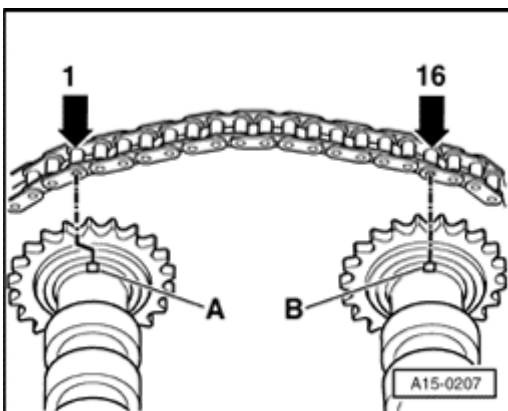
First And Sixteenth Drive Chain Rollers Installed On Chain Gears
